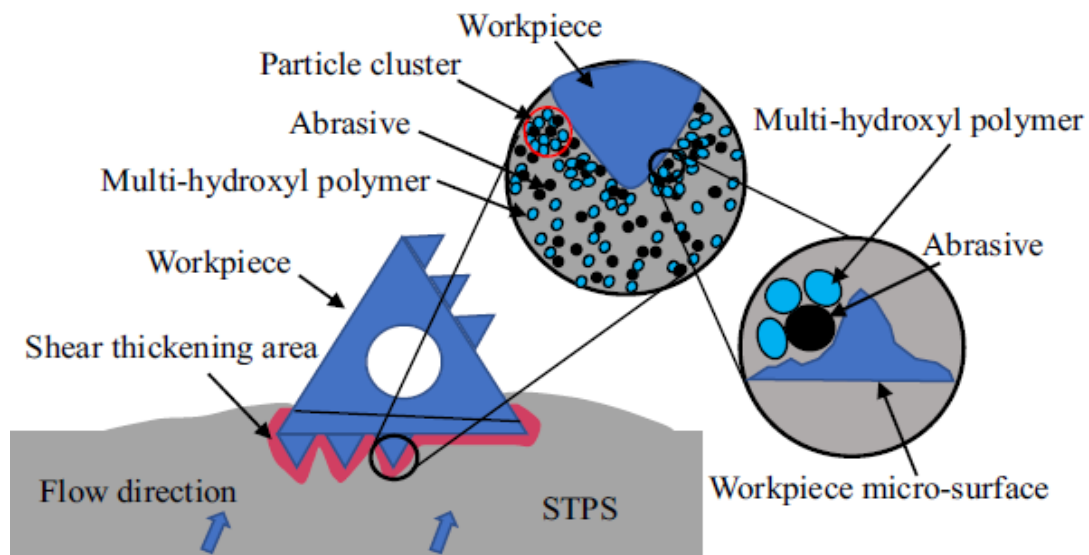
Mechanism of the Shear Thickening Polishing Method [38].
